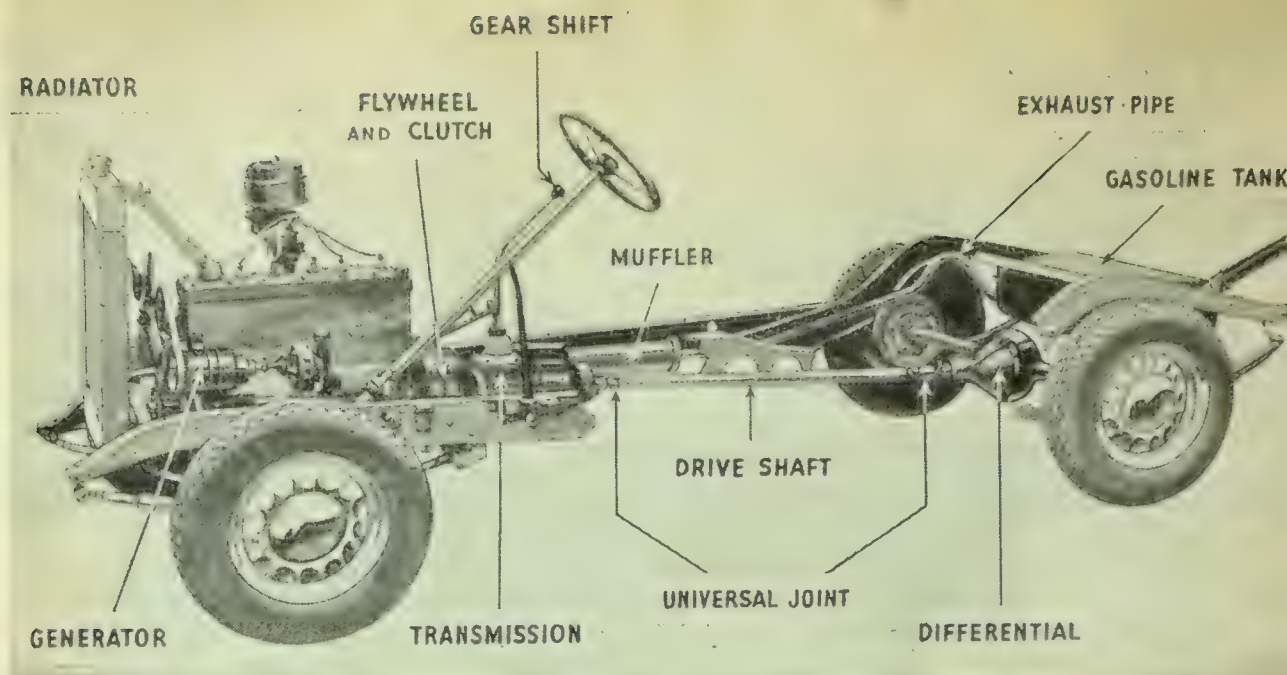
The chassis of an automobile. The *universal joints* in the drive shaft are somewhat like the ball-and-socket joints in your body. A rigid drive shaft would break when the car bounced.
